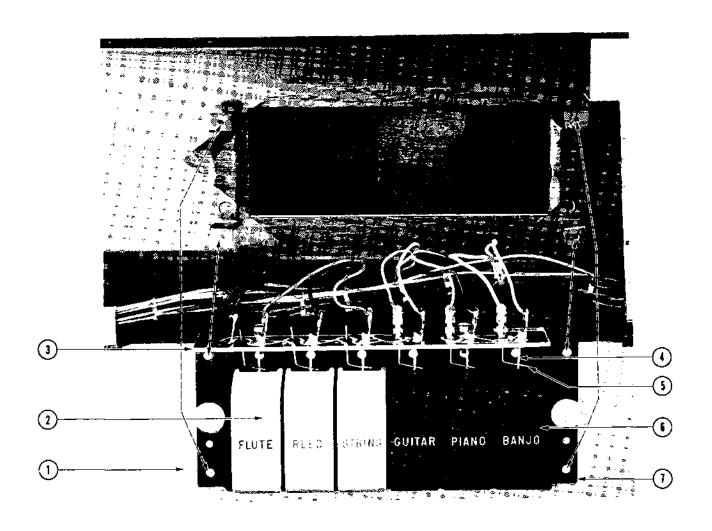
STOP TAB SWITCHES DISASSEMBLY
